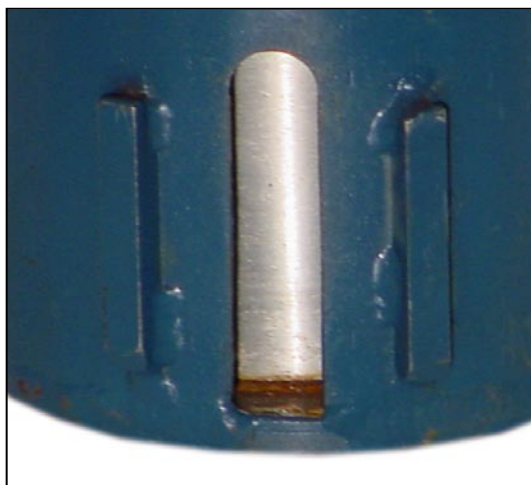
Fins Installed on the ‘B’ Flow Modifying Tool
